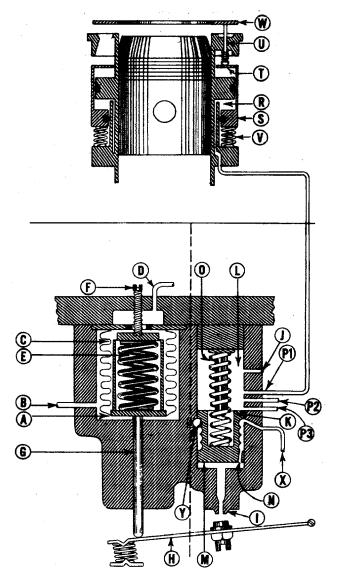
Schematic Drawing of Cylinder Unloading Mechanism (Unloaded)
